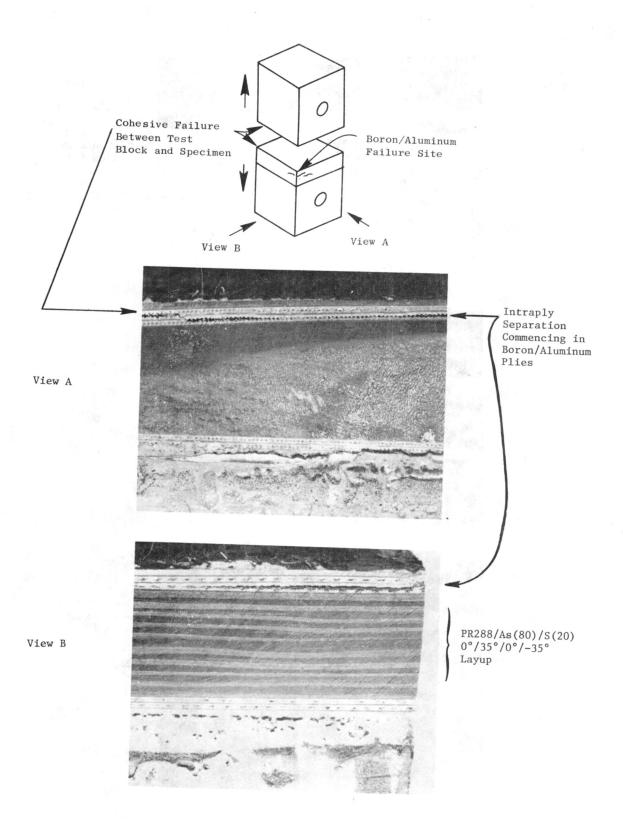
Flatwise Test Specimen Superhybrid Blade RL002. (Specimen F2-3)
